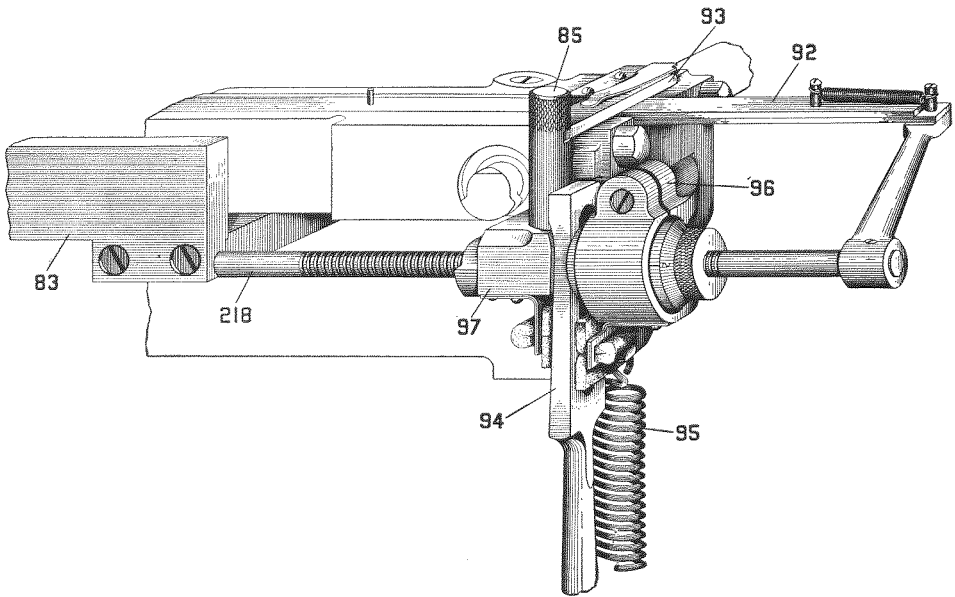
Enlarged view of the left vise jaw 83, the adjusting rod 218, and the locking pin 85. The locking pin 85 in the later machines is not operated by hand, but by the rod 92, which operates the lever 93, which raises the pin 85, and allows it to rise, to release, or descend so as to lock the rod 218. By this device the operator is enabled to set the pin 85 by means of the rod 92.
